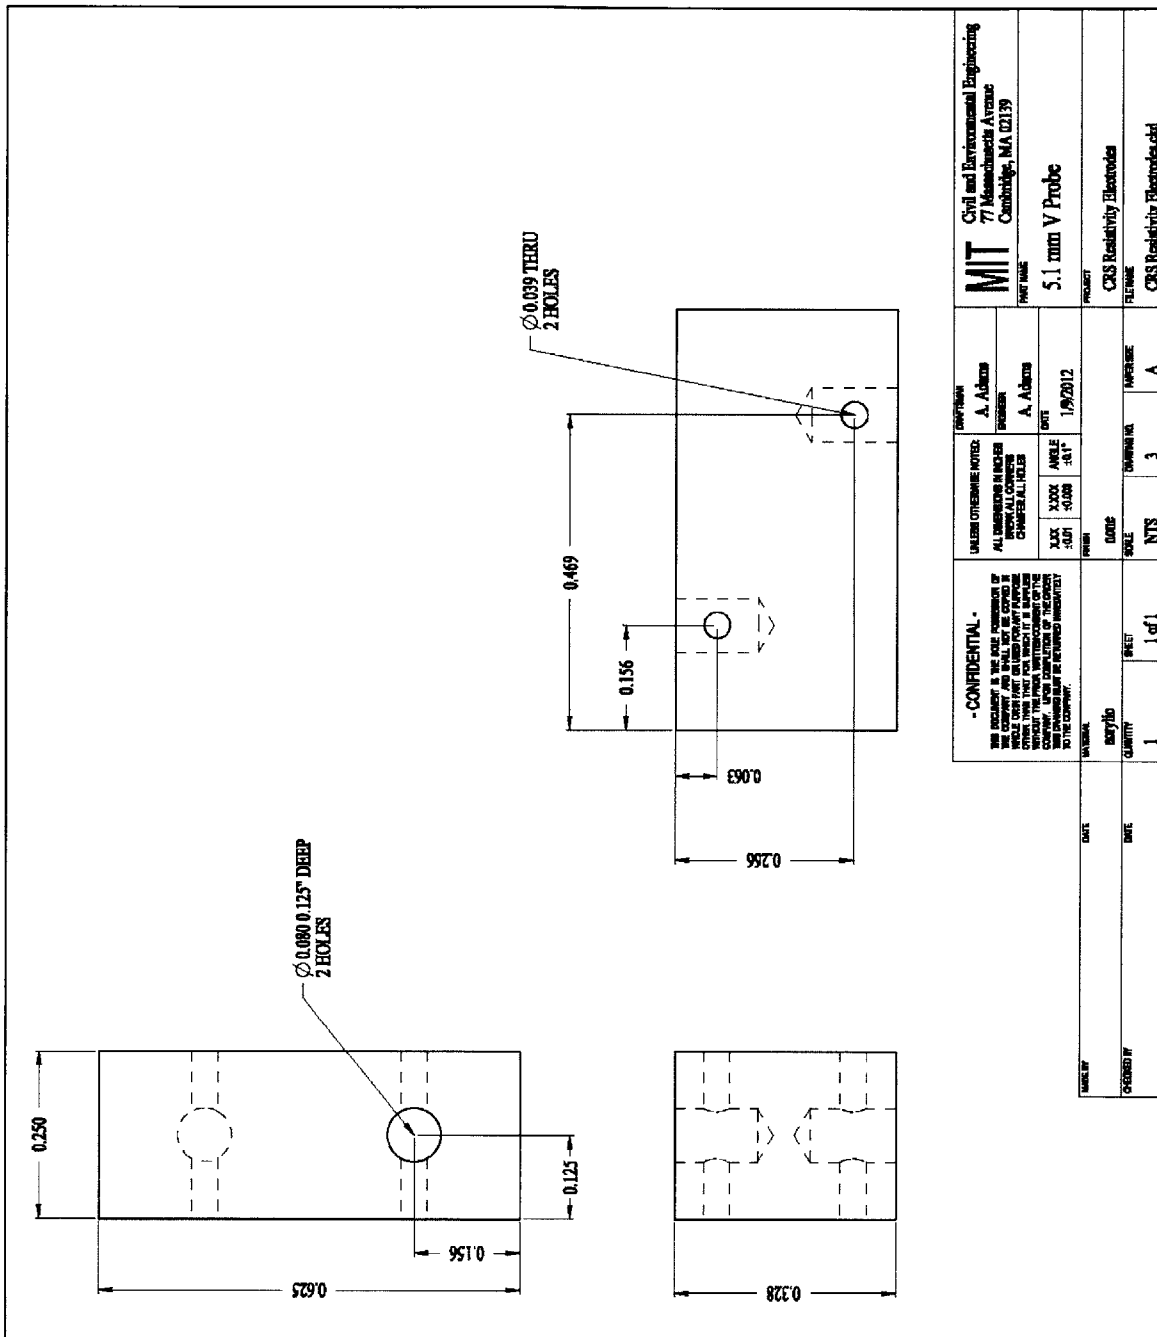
CRS Electrodes: Drawing 3, 5.1 mm probe
